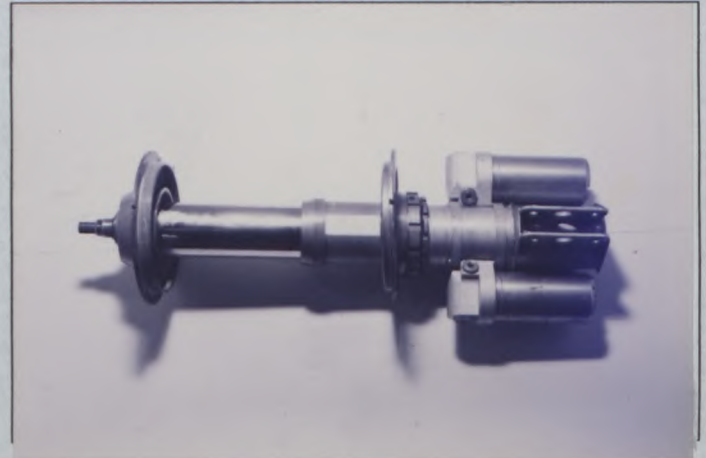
HEAVY DUTY FRONT DAMPER UNIT
